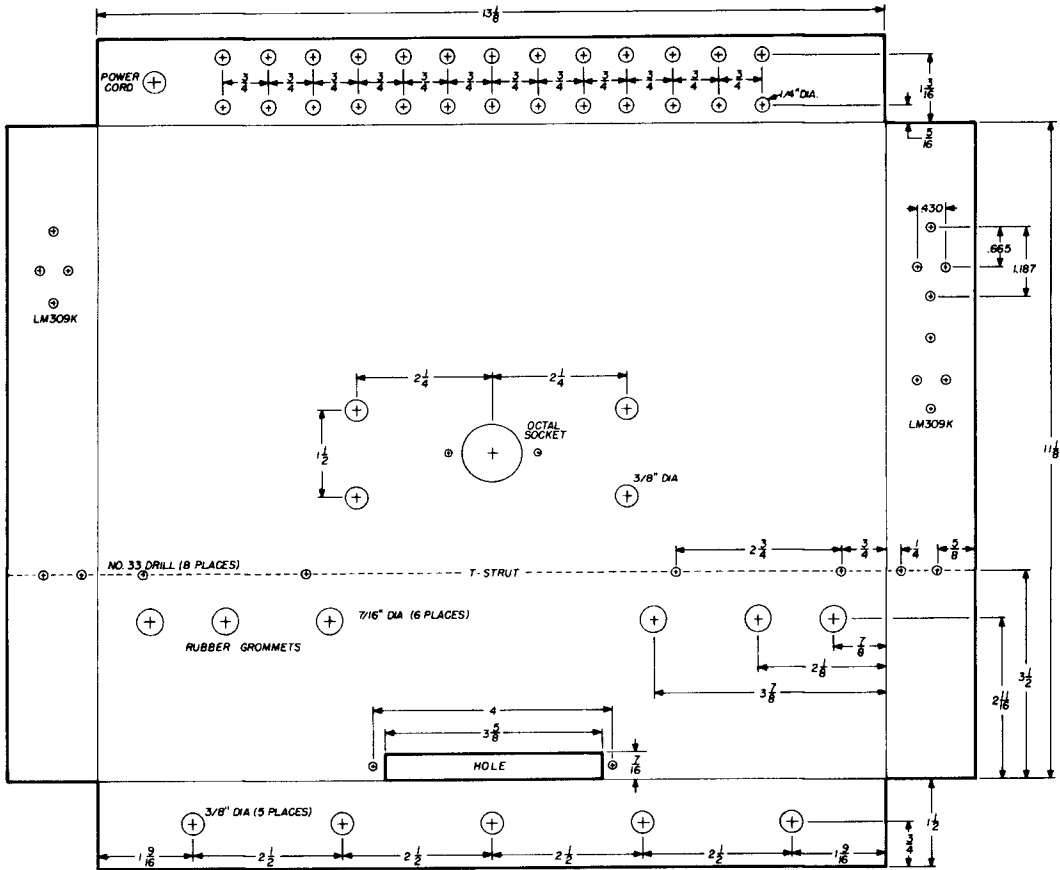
Chassis drilling instructions; the power-supply holes are omitted because they will not apply for different parts.
